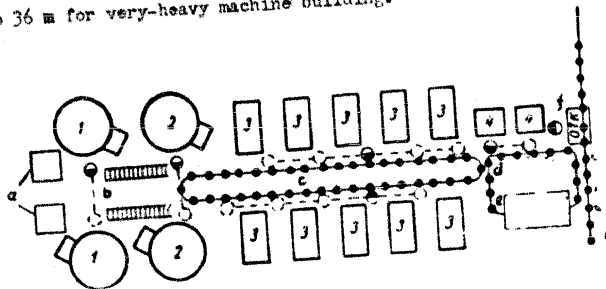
Scheme of Planned Equipment of Assembly Line for Fabrication of Gears
